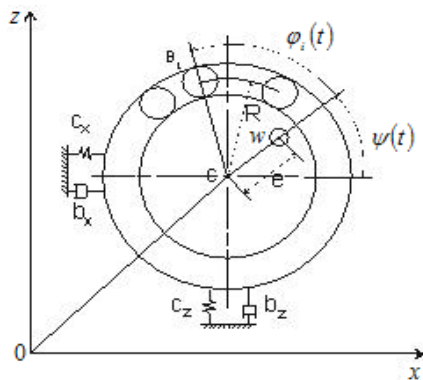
Dynamic model of rotor of a knife grinding machine with ABD.
